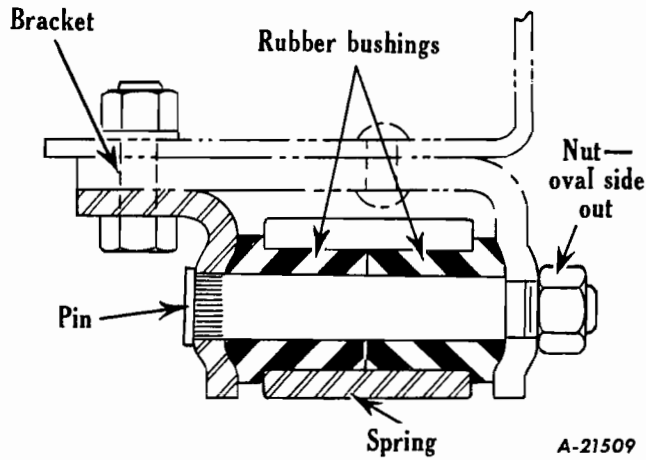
Front Spring Front Bracket For Models L-110, L-120, LM-120.
